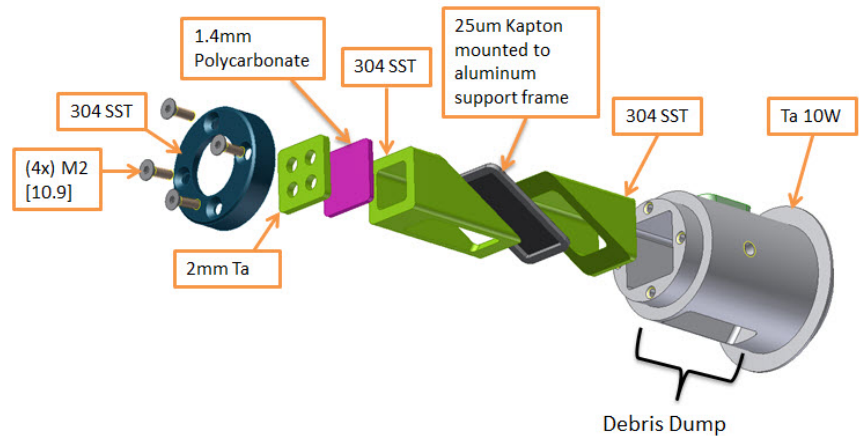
Exploded view of the KBO debris plug. Components are loaded into the back of the debris plug housing and then held in place by the rear cover. Typical consumable consists of only a 1.4 mm thick polycarbonate window.
